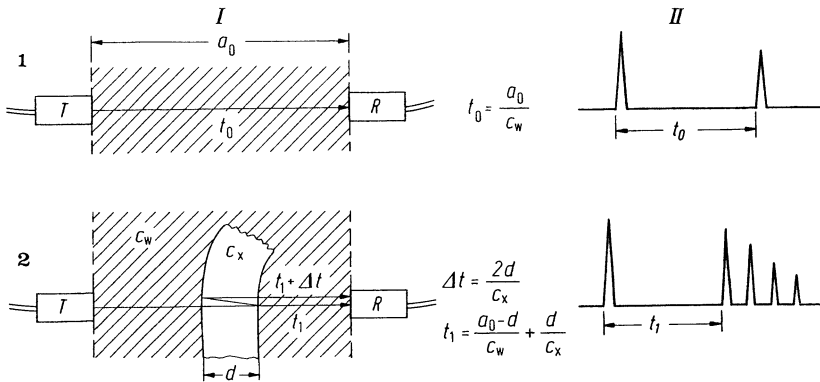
Velocity of sound measurements on spheroidal grey-iron castings for the automobile industry. I immersion technique arrangement, II echo pattern, schematic. 1 measurement without test piece; 2 measurement with test piece inserted
